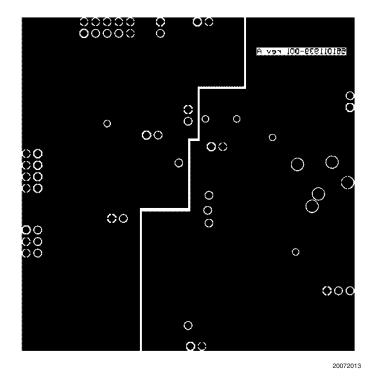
LM4930ITL Demo Board Bottom Layer
